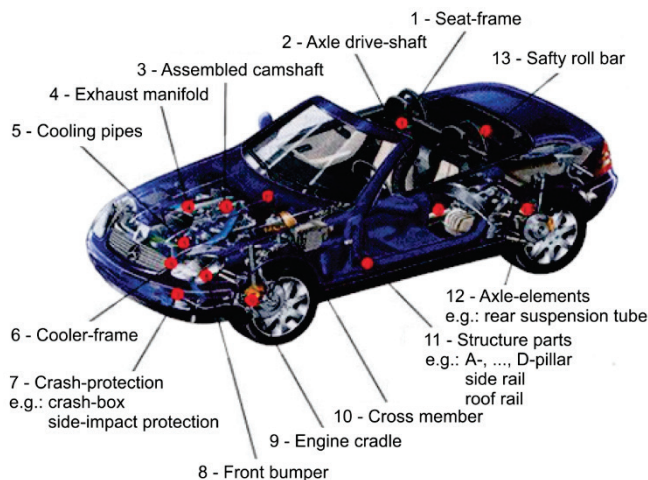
Examples of the automotive parts manufactured by tube hydroforming process [23]
